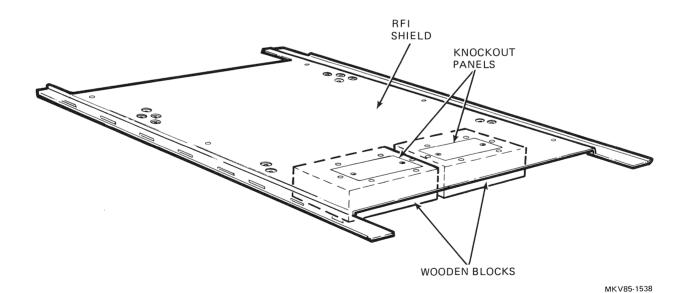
RFI Shield Panel - Knockout Plug Removal
